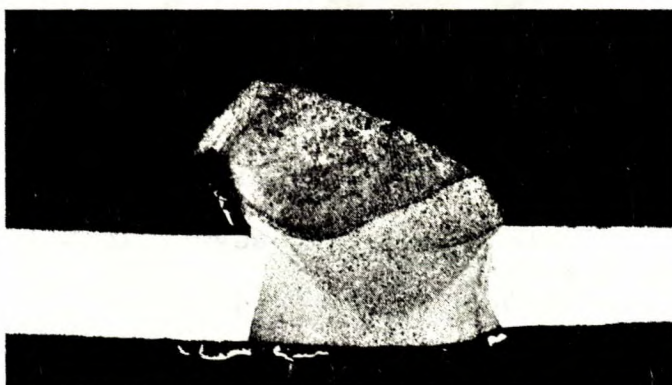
Section C3, showing fracture in weld metal near junction with connecting tube. Etched Oxalic Acid X8
